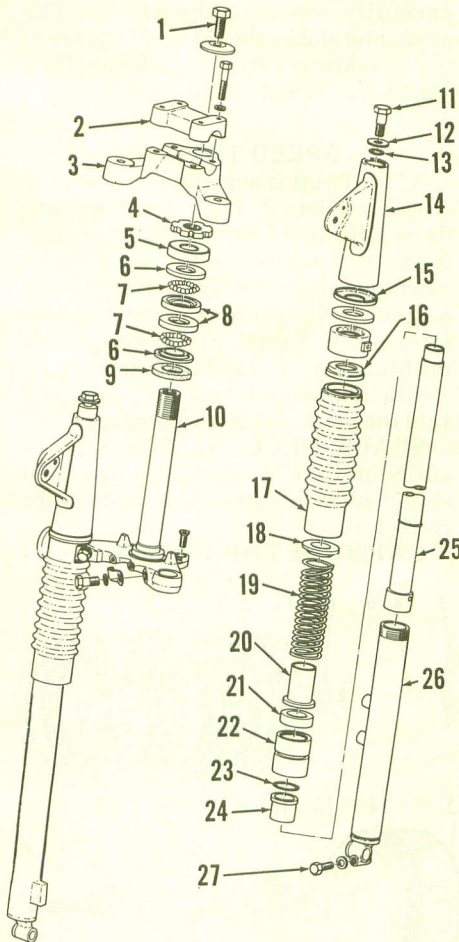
Exploded view of front fork assembly used on HS-1. Forks used on other models are similar.
